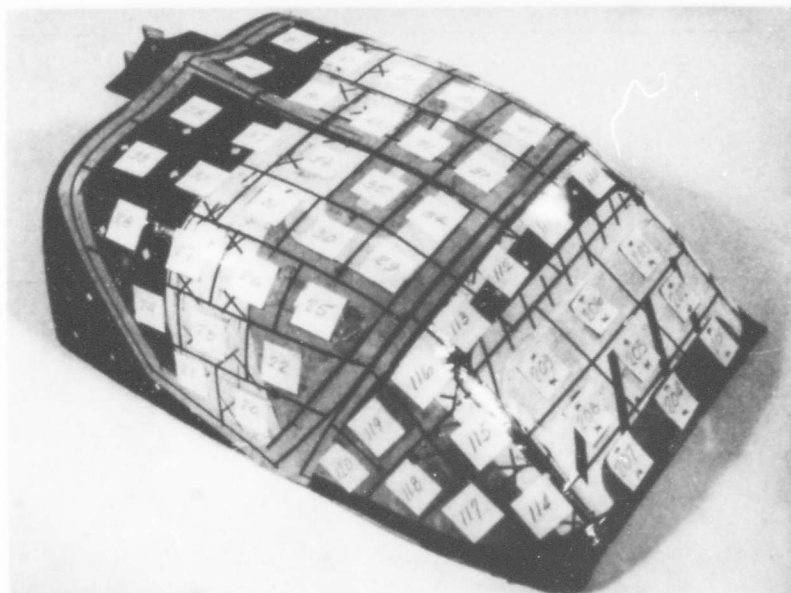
View of Forward Right Side of Windshield and Canopy Deflection Pad Numbers
